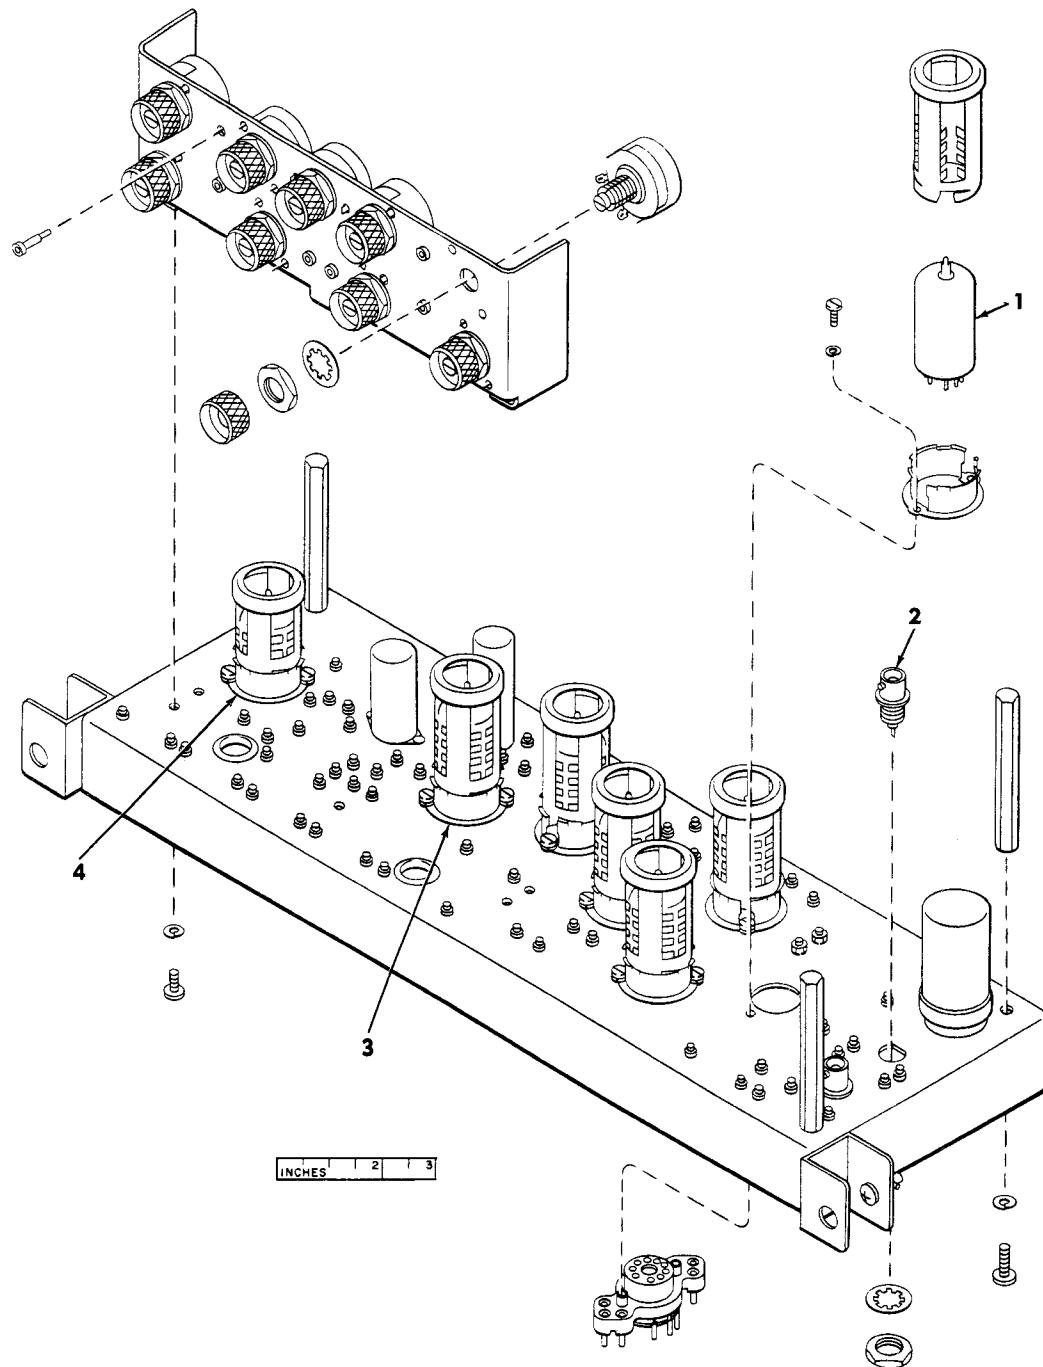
Generator, pulse sweep (9139349)—partial exploded view
